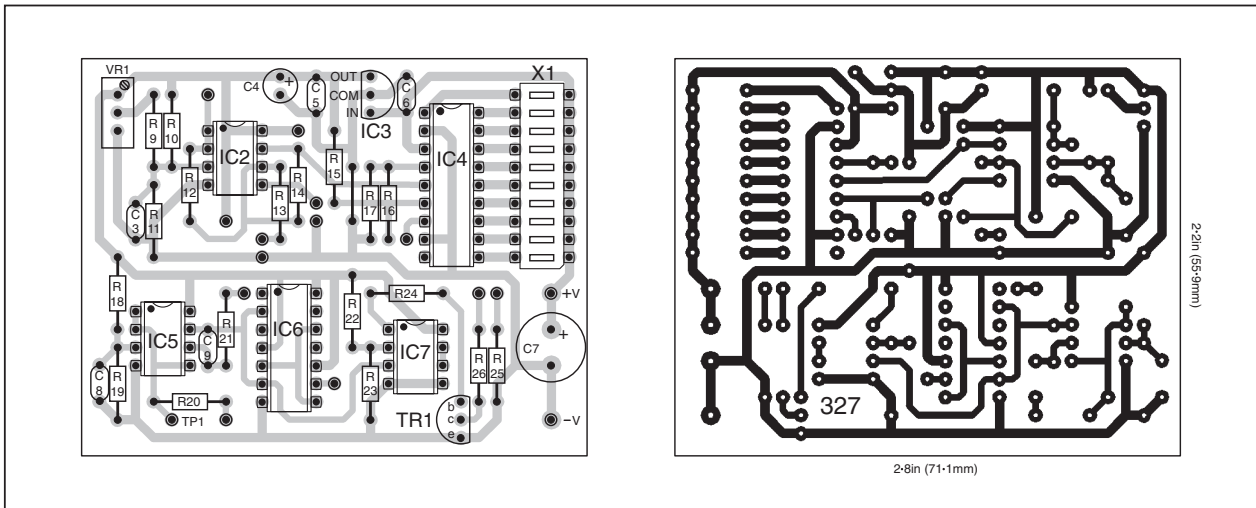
Main printed circuit board topside component layout and full-size underside copper foil master pattern.
